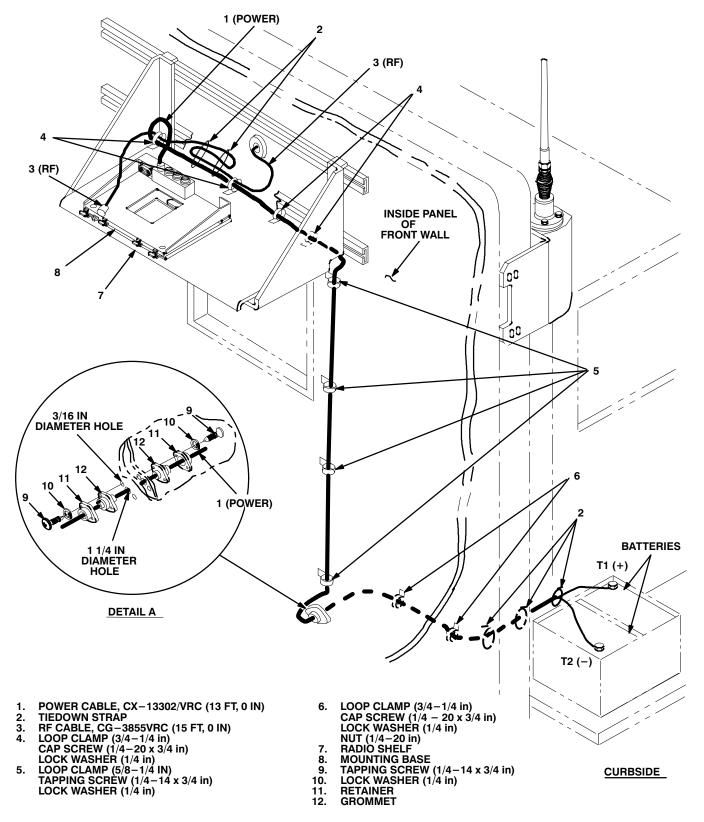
(2). Cable Installation - M109 Series: Interior Cabling
